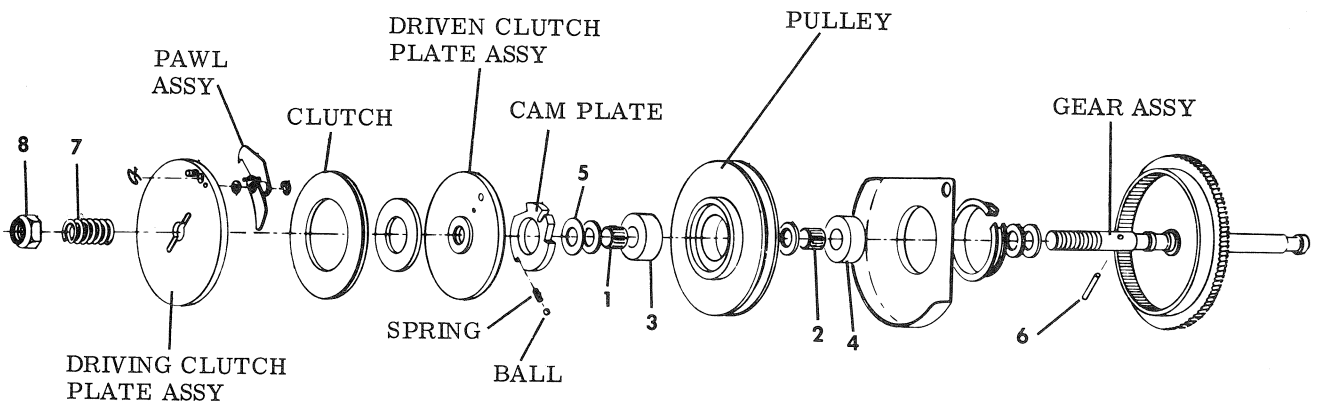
FILM FEED CLUTCH ASSEMBLY
